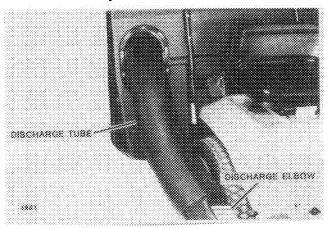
Install Discharge Tube (30" Mowr Shown)
